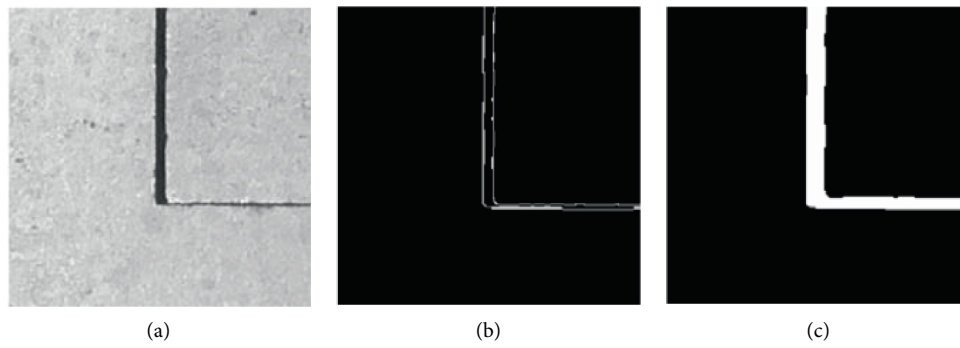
90-degree broken line weld. (a) Original image of weld. (b) Image of weld edge. (c) Image of weld trajectory.
